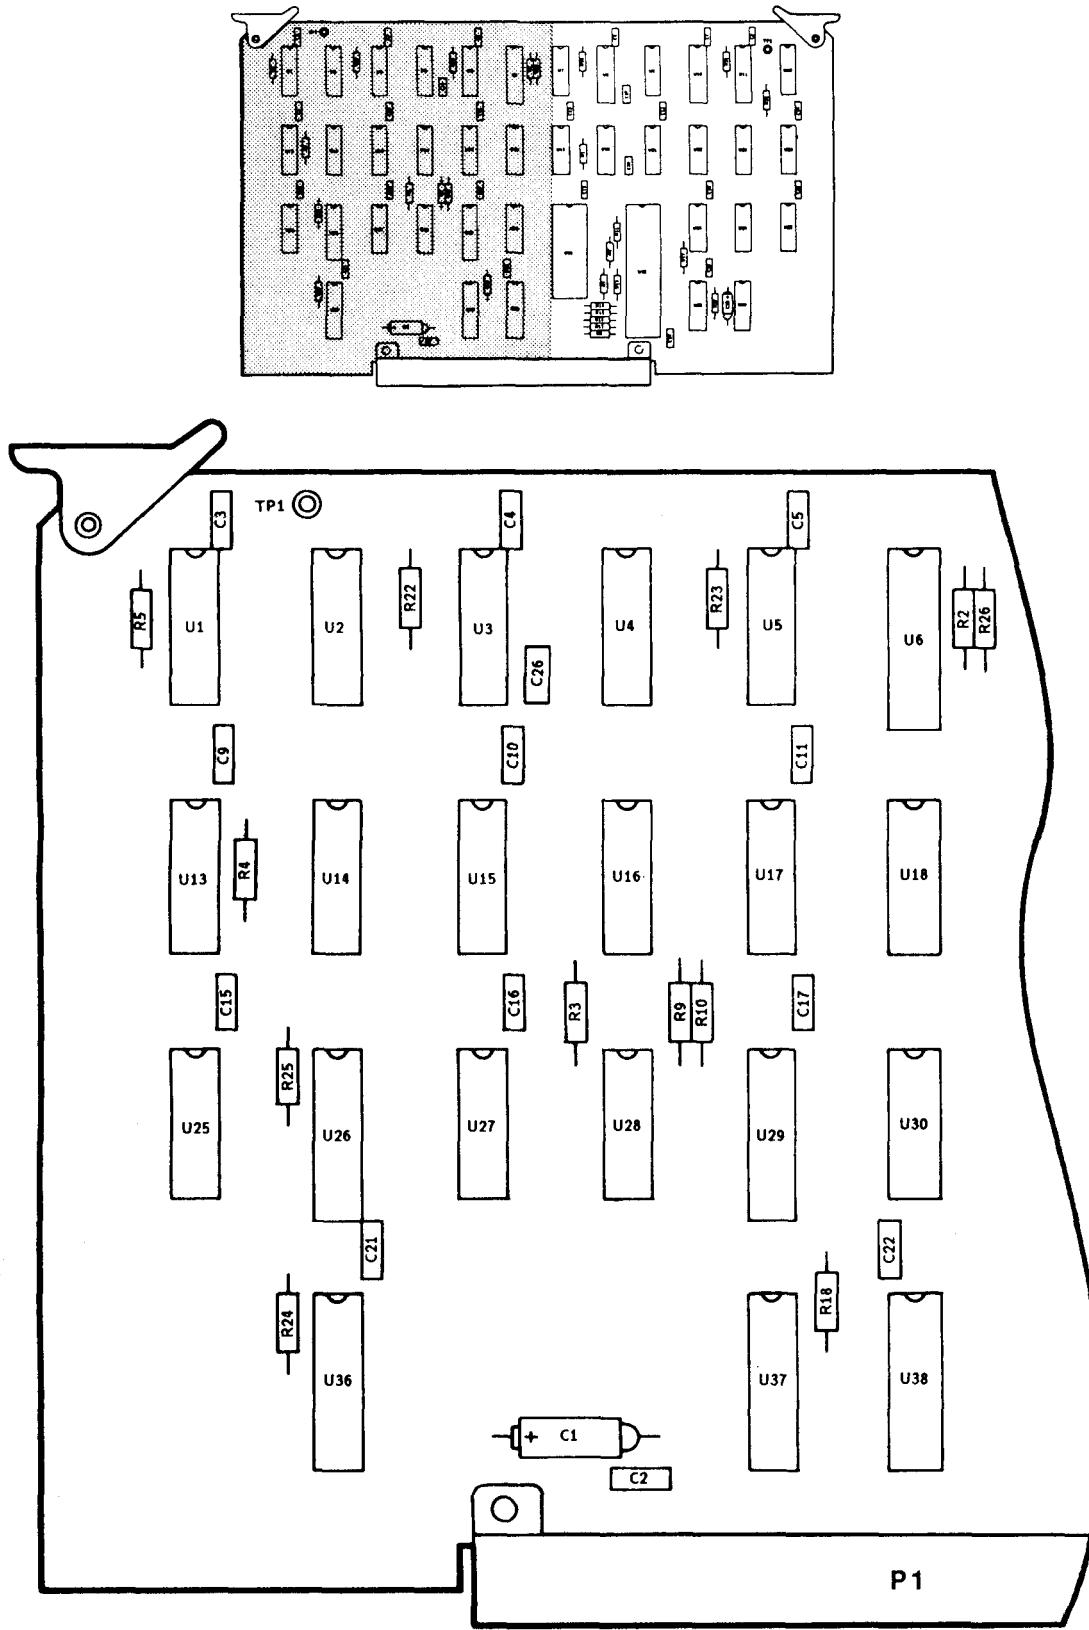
Circuit Card Assembly, Auxiliary Interface (3A1A2) (Sheet 2 of 2).
